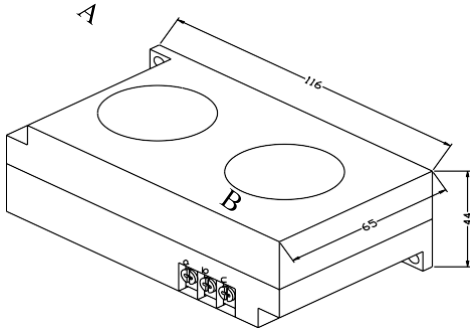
CT1 mechanical drawing (φ36 drilled hole)
